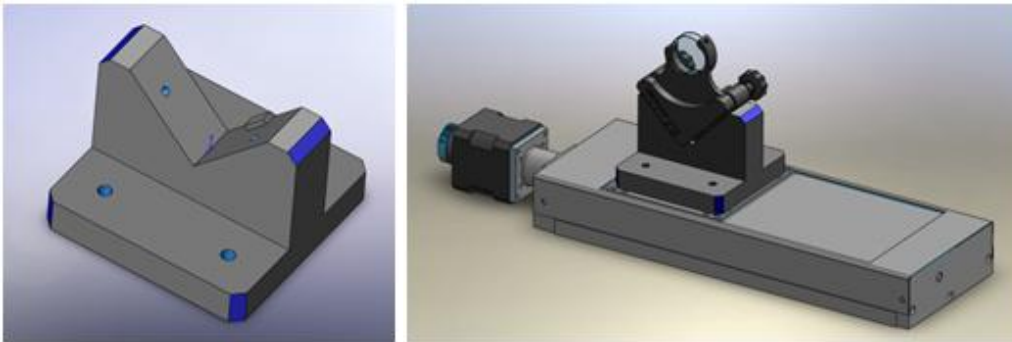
A custom base mount design for the beamsplitter optic-mount assembly (left). A full beamsplitter opto-mechanical assembly located on the alignment bench (right).
